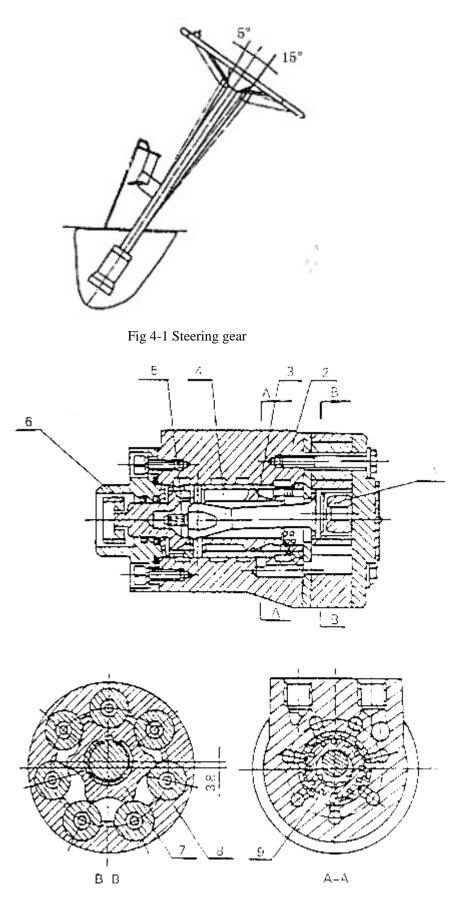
Cycloid Fully Hydraulic Steering Gear
